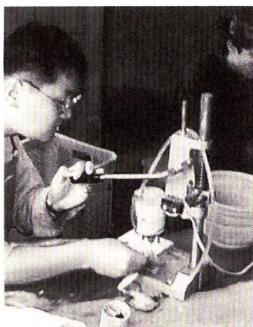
Picture of a worker operating a prototypical drilling-machine.
